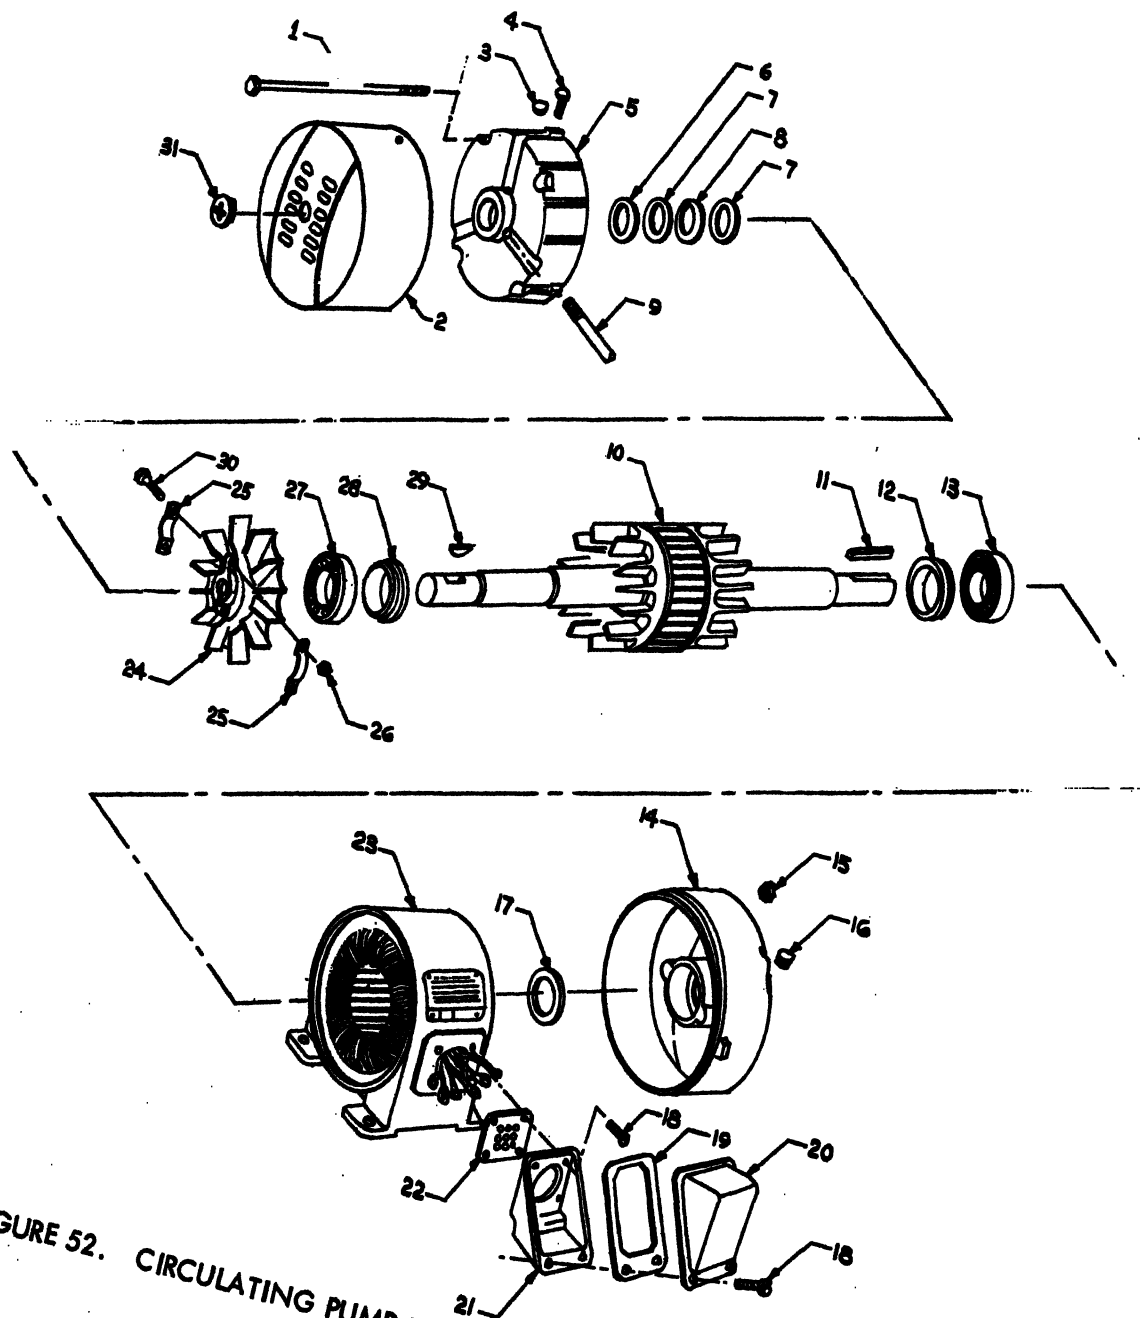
CIRCULATING PUMP MOTOR ASSEMBLY AND DISASSEMBLY
